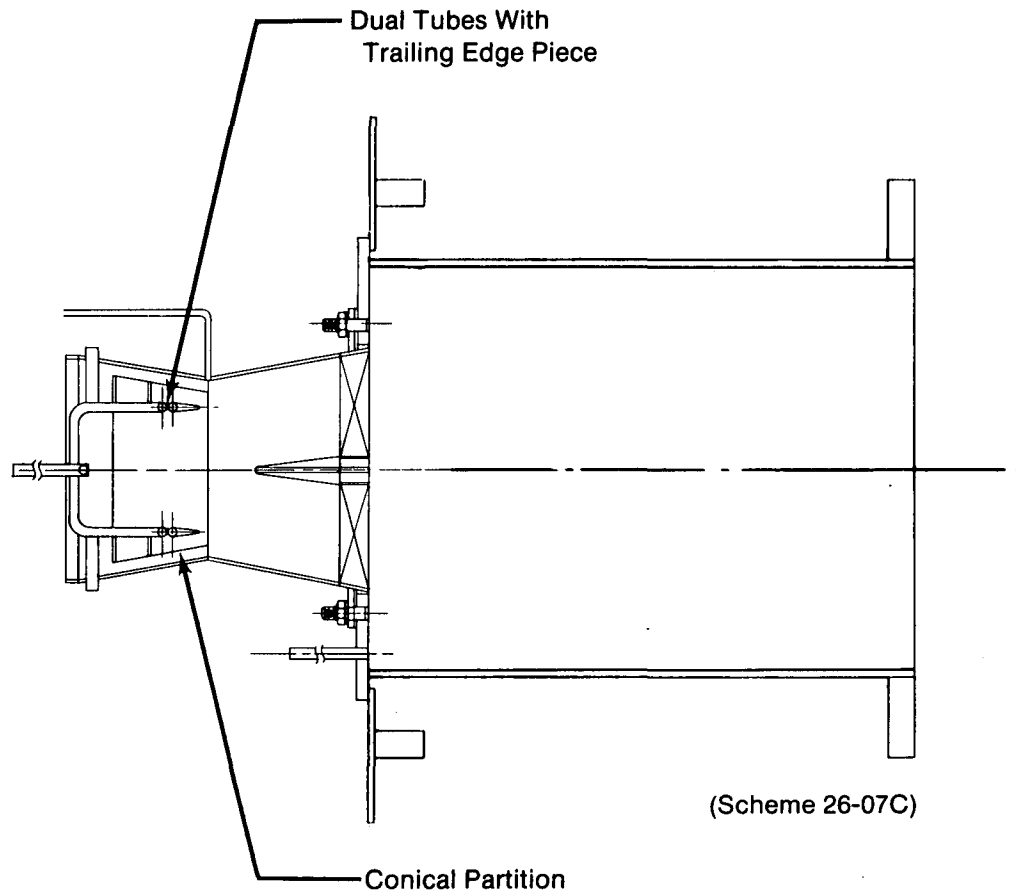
Intermediate Configuration of the Fuel Injector Spray Ring
